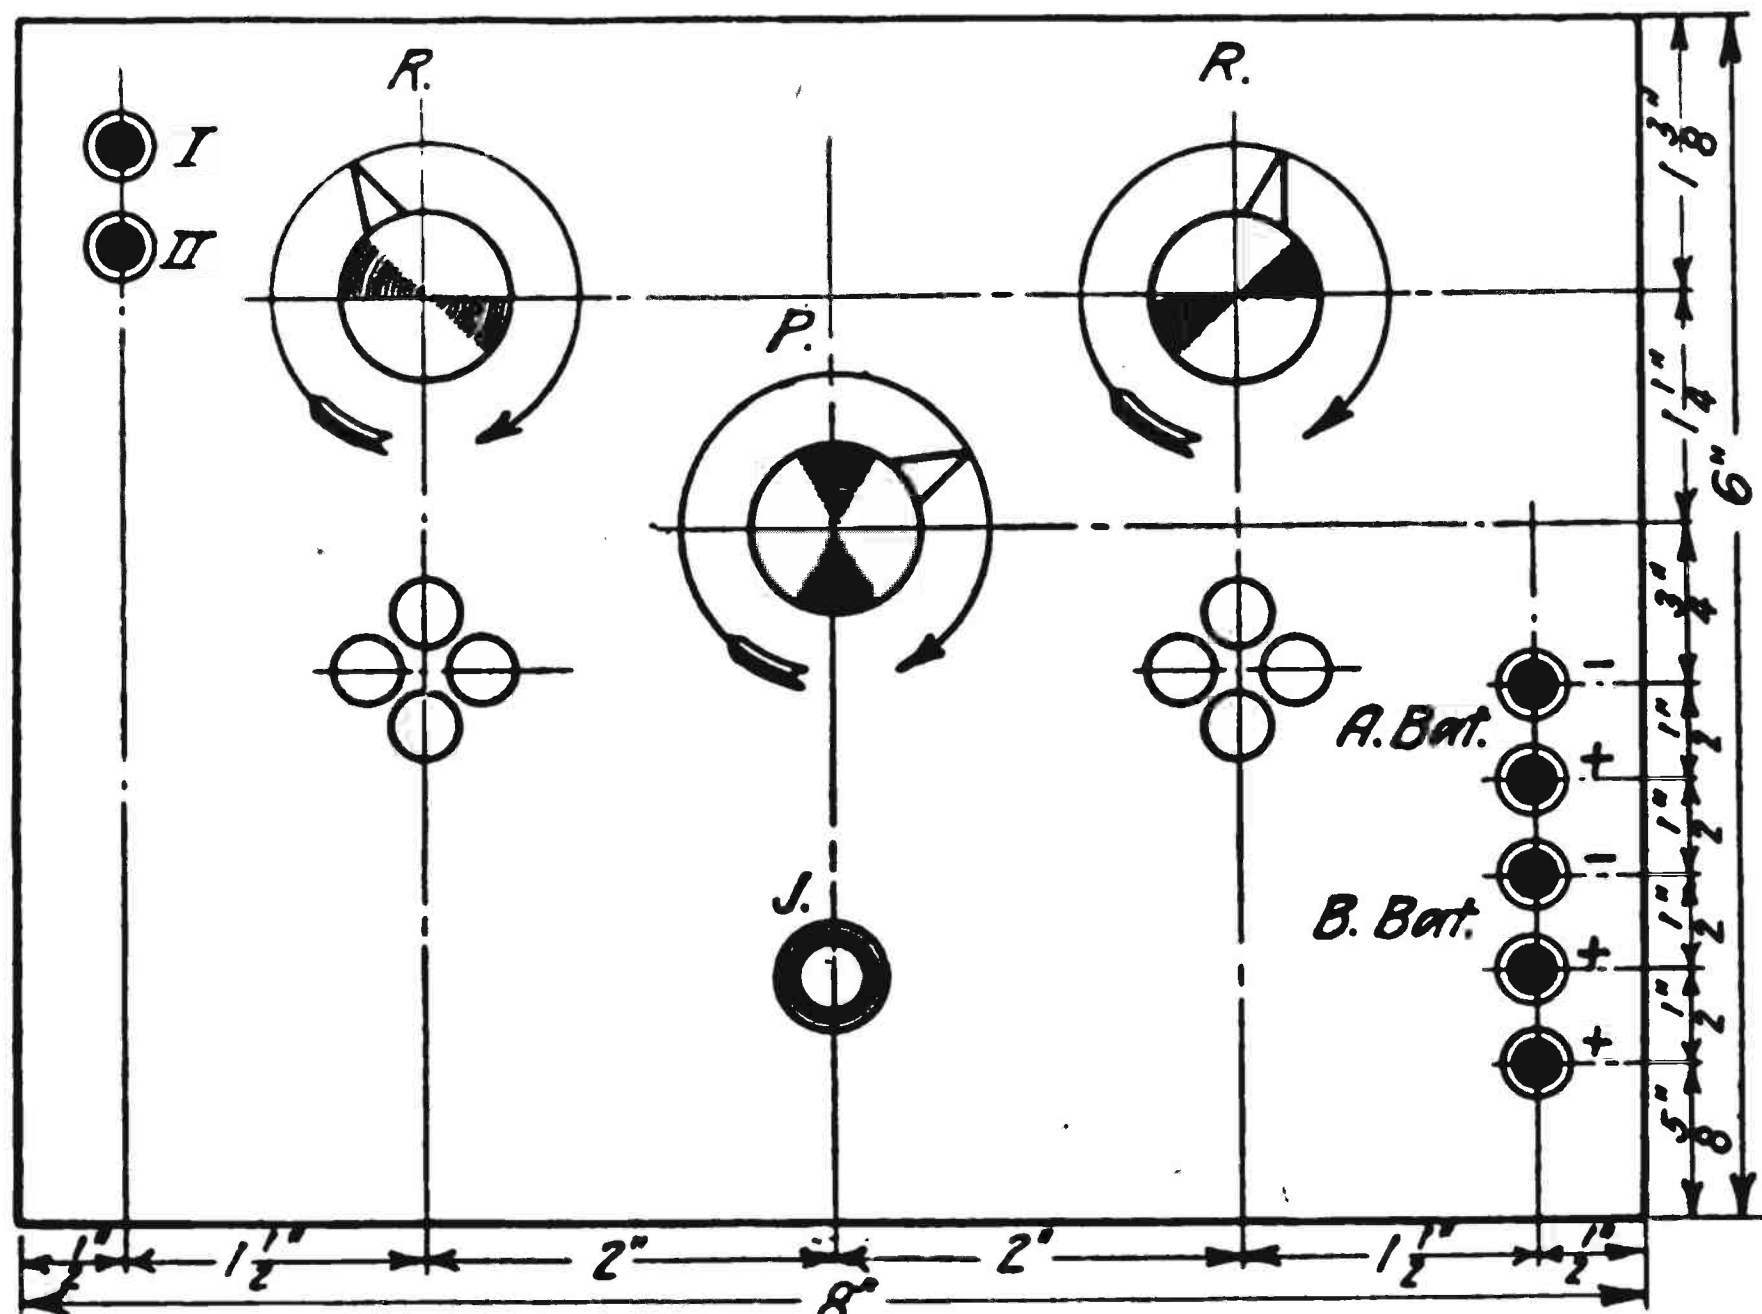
Diagrammatic front view of the panel layout with full dimensions for drilling and setting the various holes.
